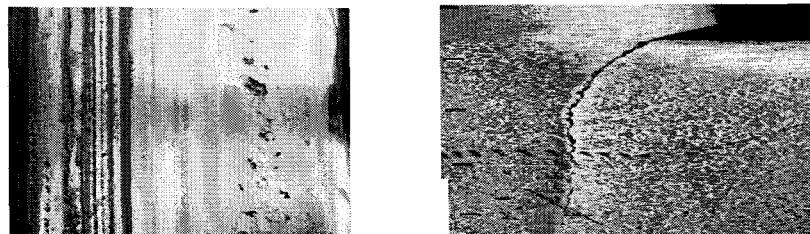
Damage of railway wheel tread(left) and axle(right)
